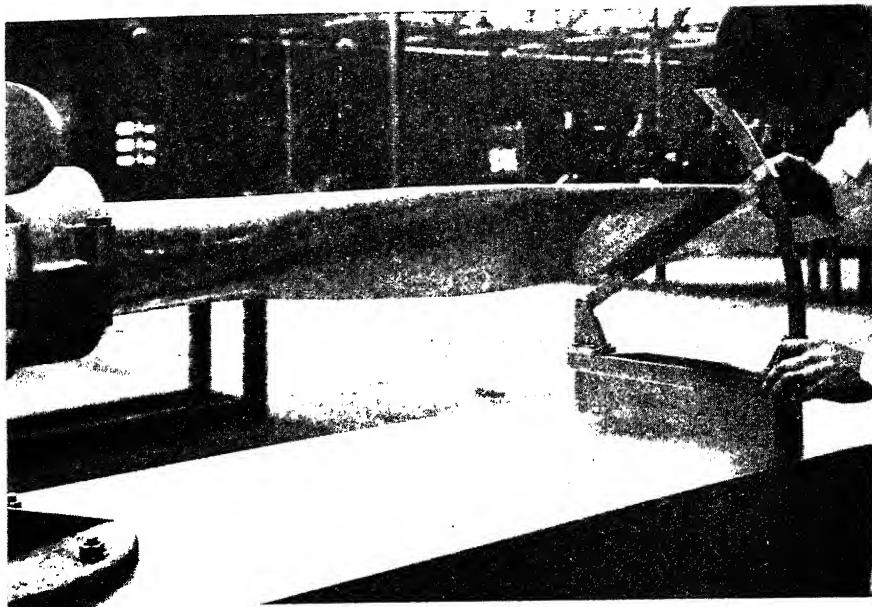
CHECKING BLADE ANGLES ON SURFACE TABLE.
